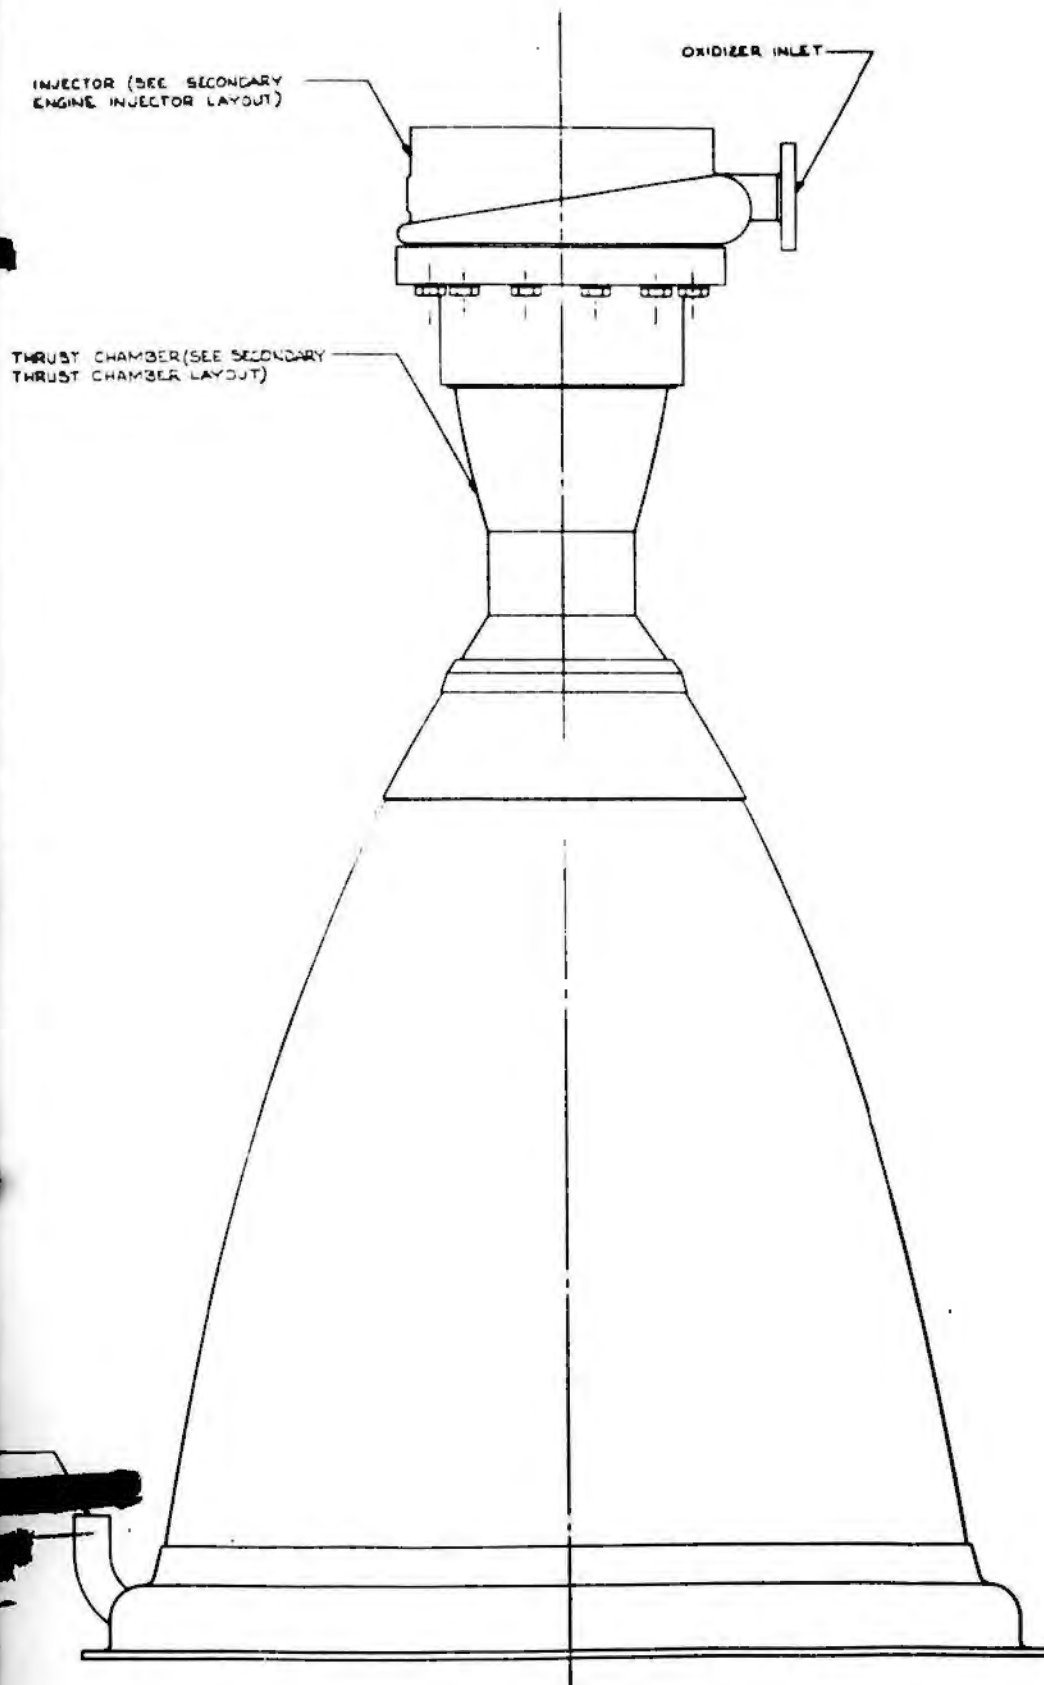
Secondary Engine Thrust Injector Assembly Layout (U)
